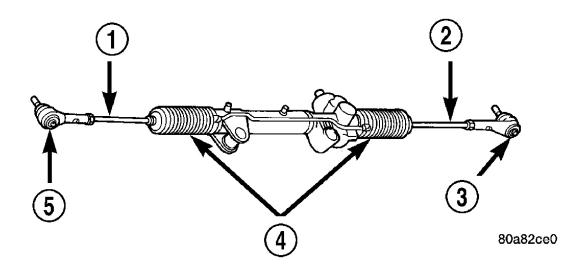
Rack & Pinion Steering Gear Courtesy of CHRYSLER LLC
